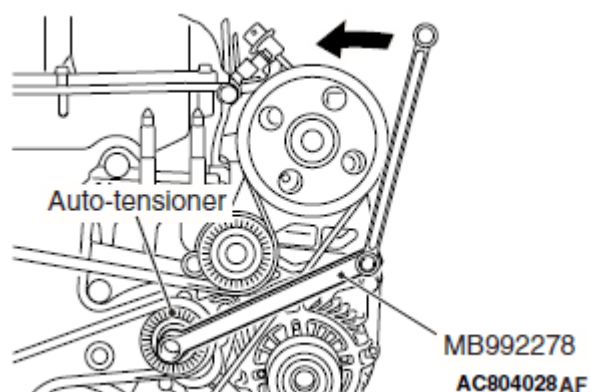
Rotating Pulley Bolt Of Auto-Tensioner With Special Tool MB992278
